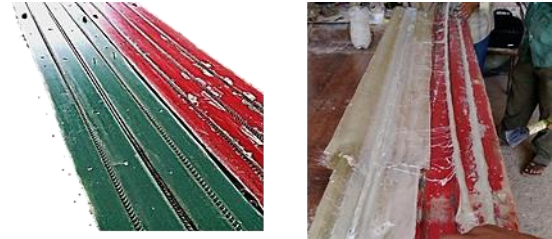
Manufactured GFRP bars: Double sets of deformed plastic molds.
